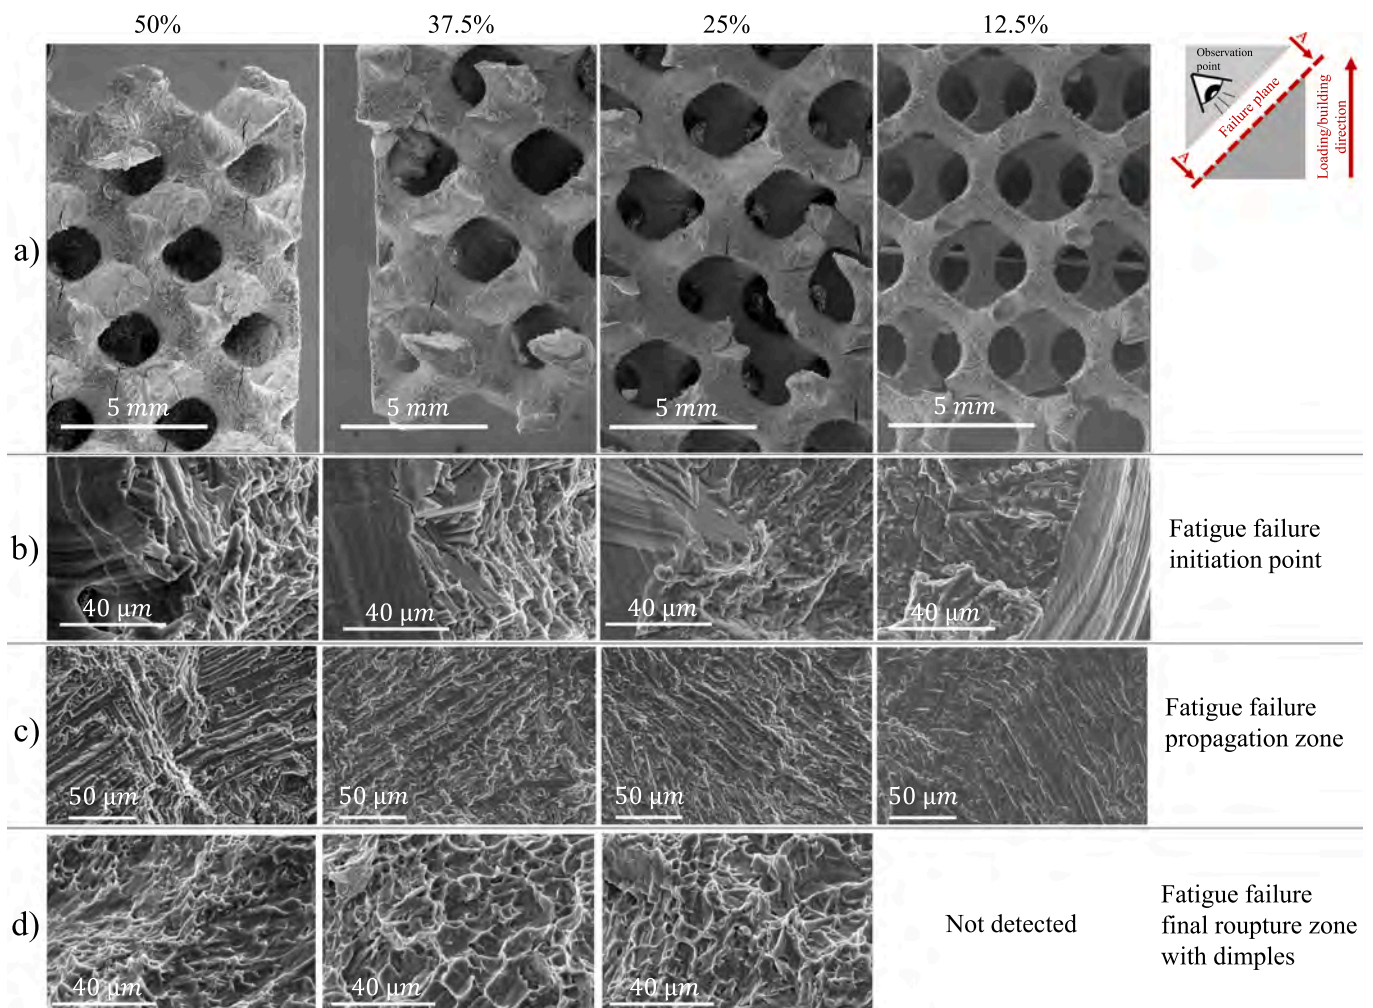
Fatigue fracture analysis showing the final condition of the investigated specimens after reaching 20% of global strain.
